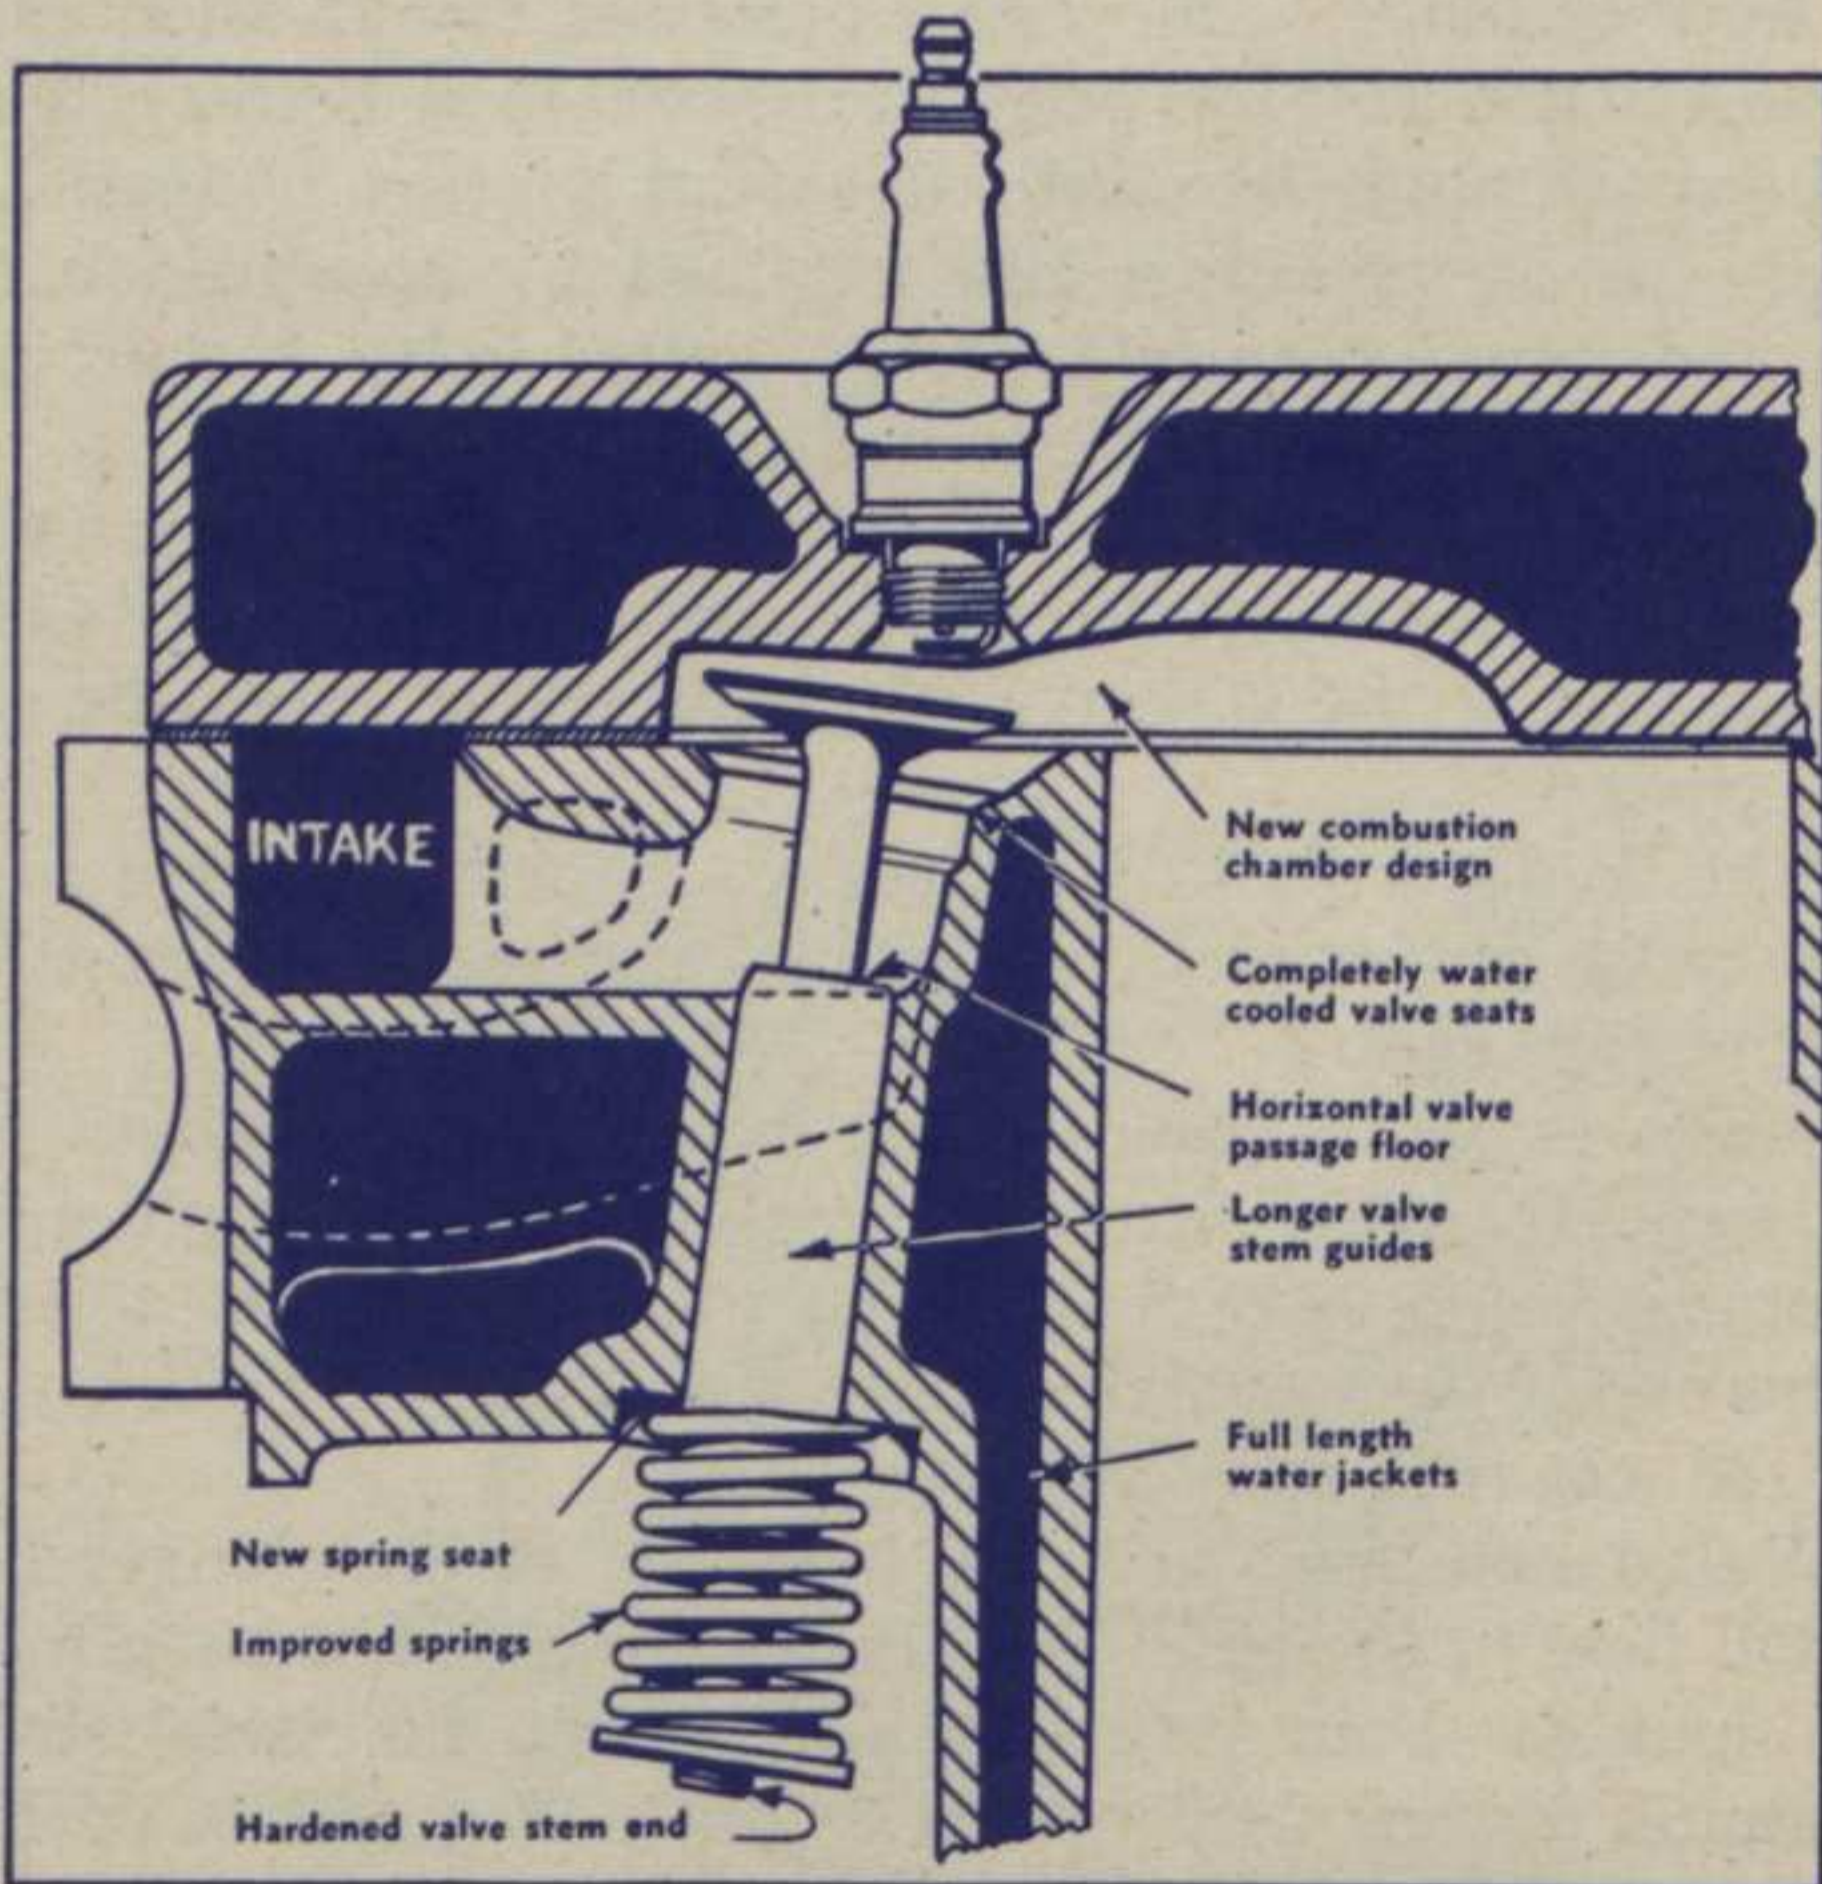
Sectional sketch showing improvements in "600" cylinder.
